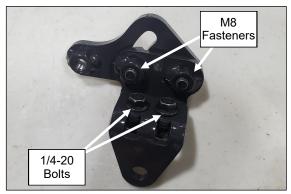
(Install Lower Pivot Bolt, OEM Dynamo)
